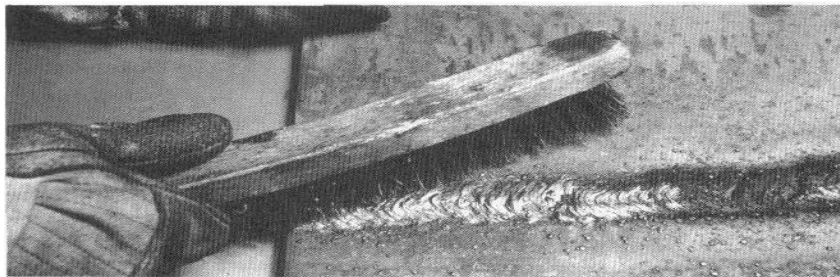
After chipping, brush the weld with a wire brush
